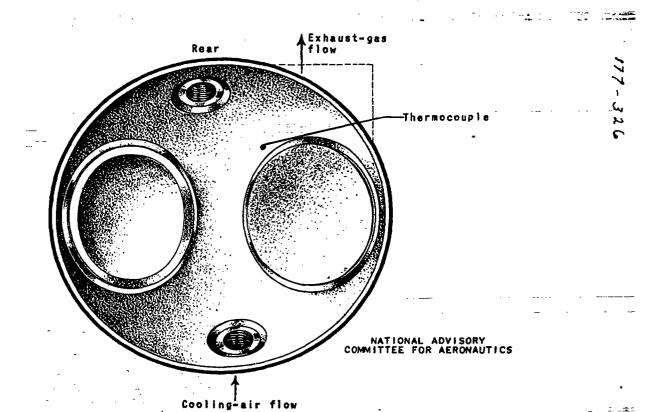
Location of exhaust-valve-seat thermocouple on a rear-row cylinder of an air-cooled engine.
